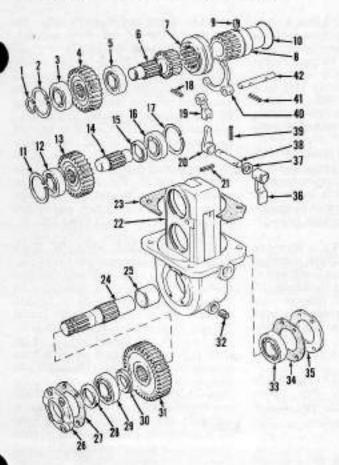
Exploded view of transfer gear box used on models equipped with Carraro front drive exies.
